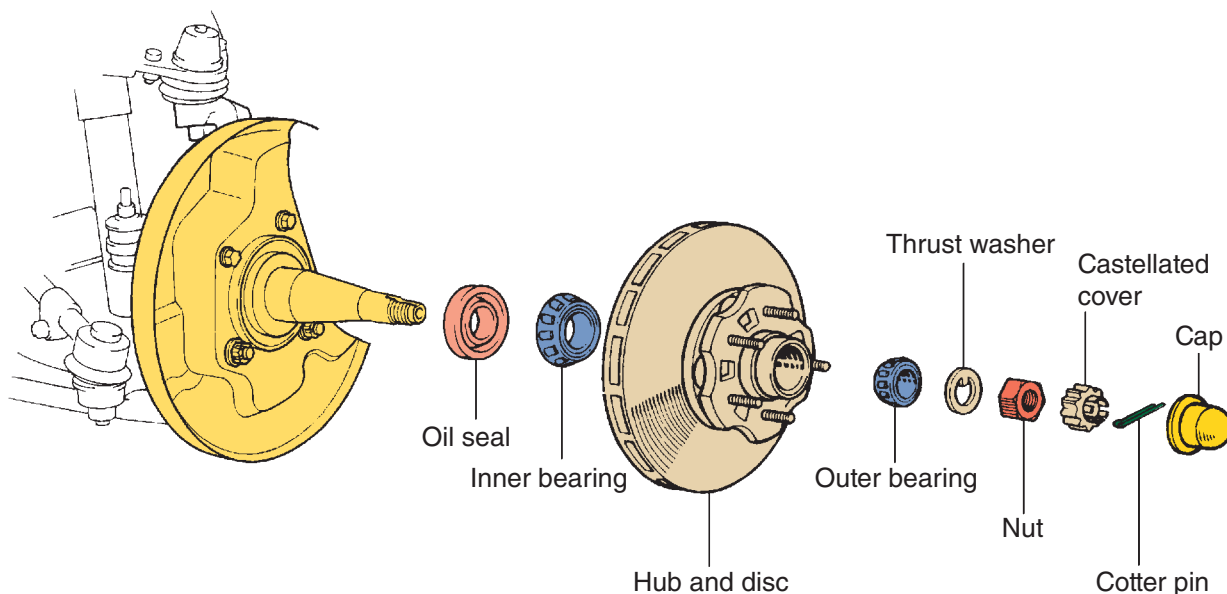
An exploded view of a typical front wheel bearing assembly for a RWD vehicle.
